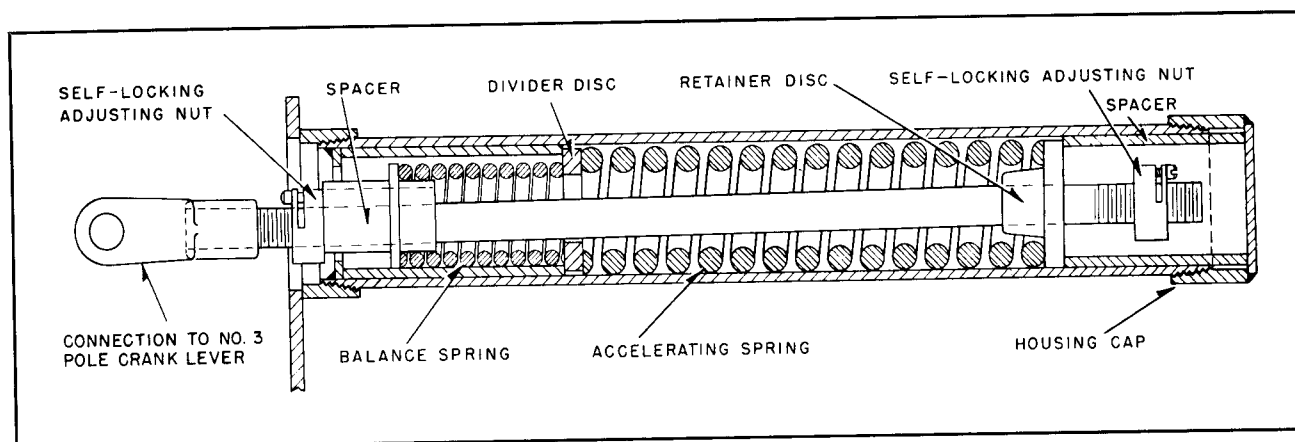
Accelerating Spring Used with Solenoid Mechanism
